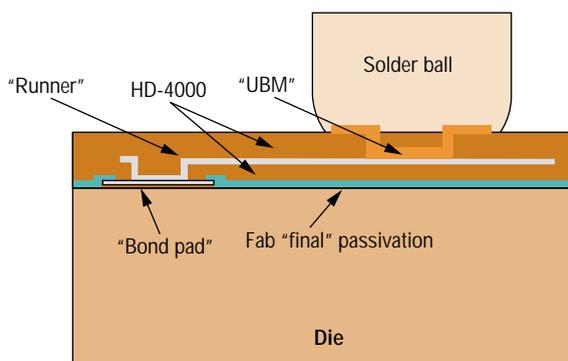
Cross-sectional view of the rerouting of the bond pads.
